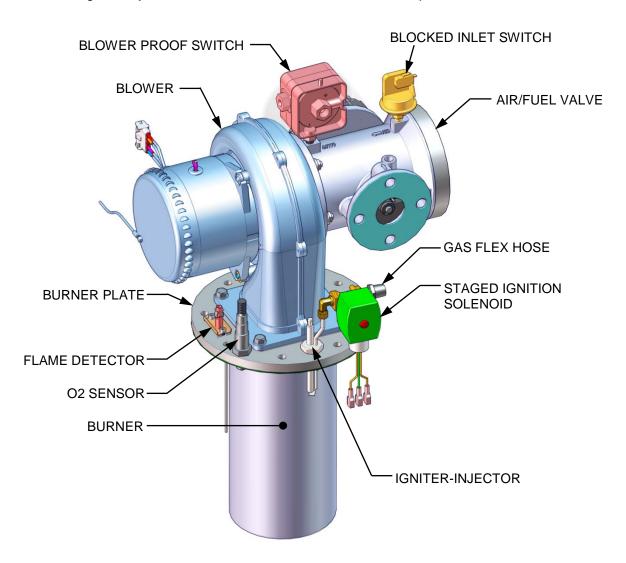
BMK 750/1000 Burner Assembly (Removed from Boiler)
